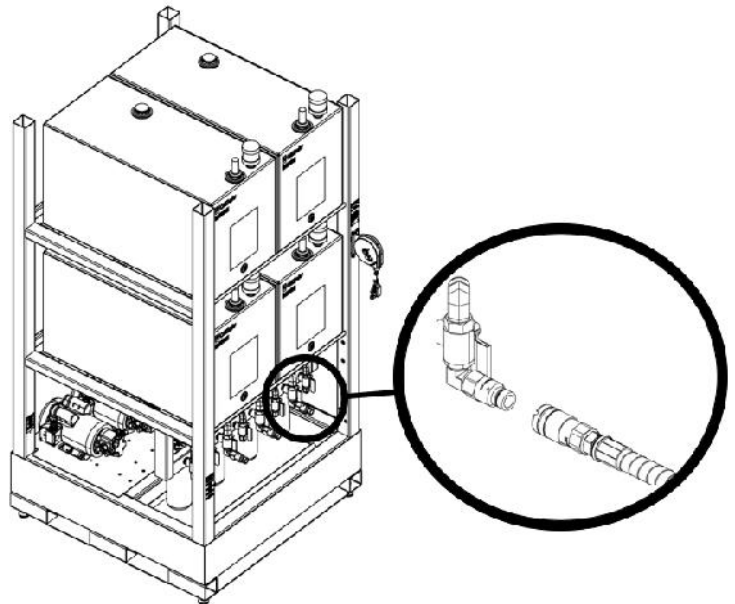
Attach Suction Hose Assembly to Fill Port Inlet
